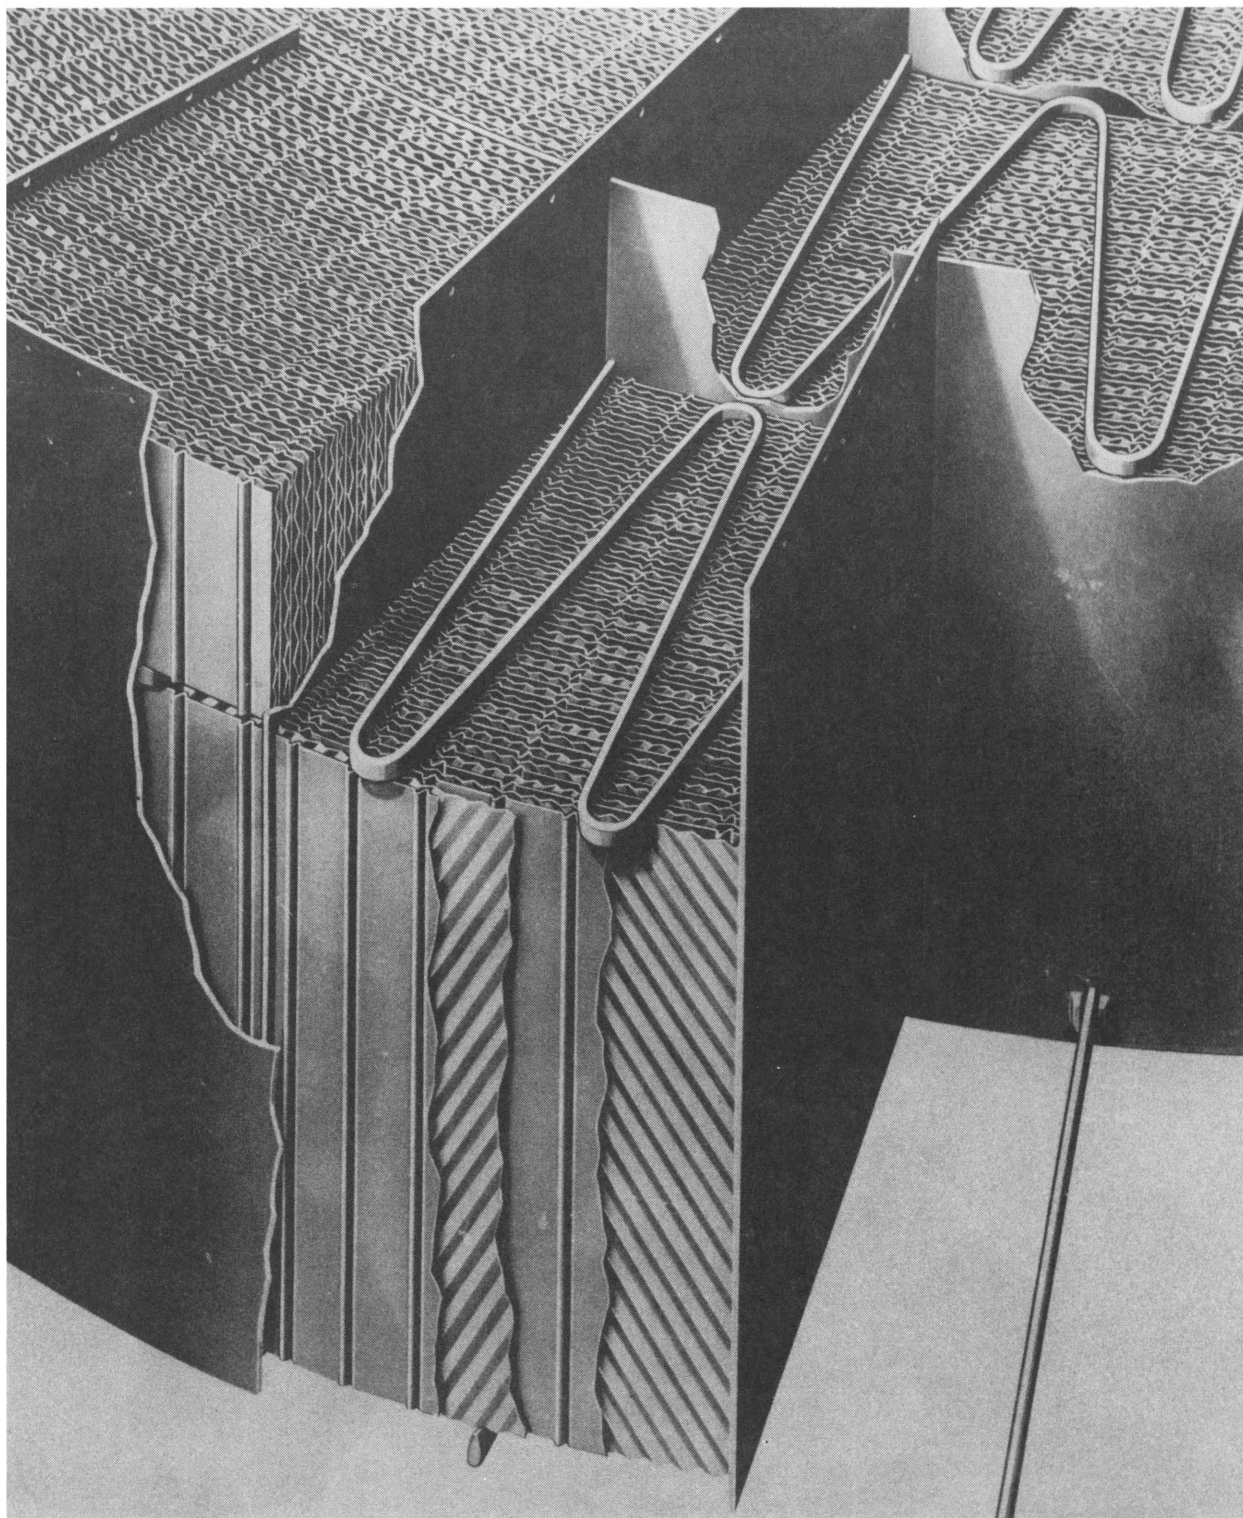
Detail of One Type of Installation of Heater Elements—Shorter Top or Cold-End Elements and Longer Bottom or Hot-End Elements.
